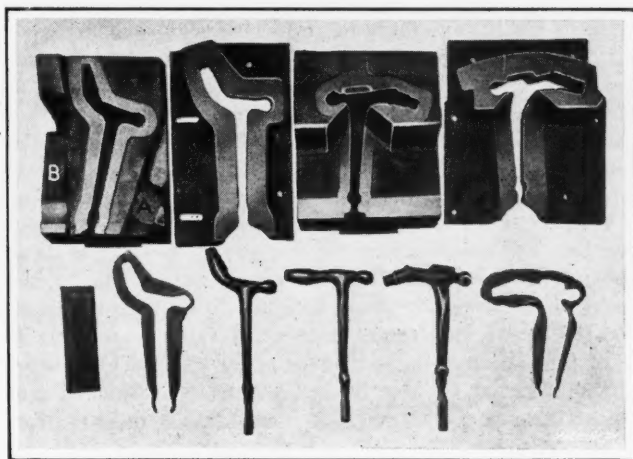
Forging and Trimming Dies for Automobile Steering Arm
